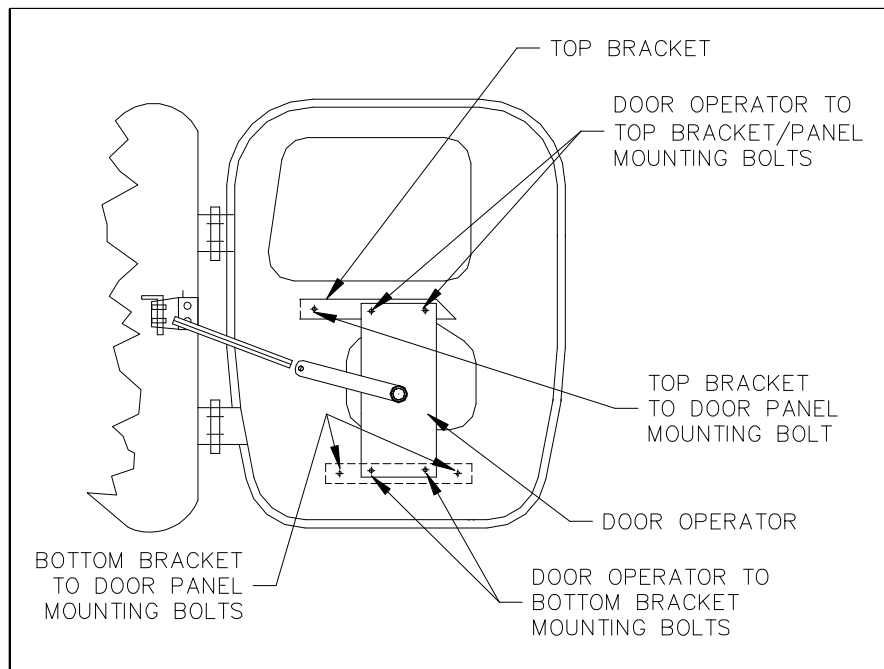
RIGHT-REAR DOOR OPERATOR MOUNTING LOCATIONS
